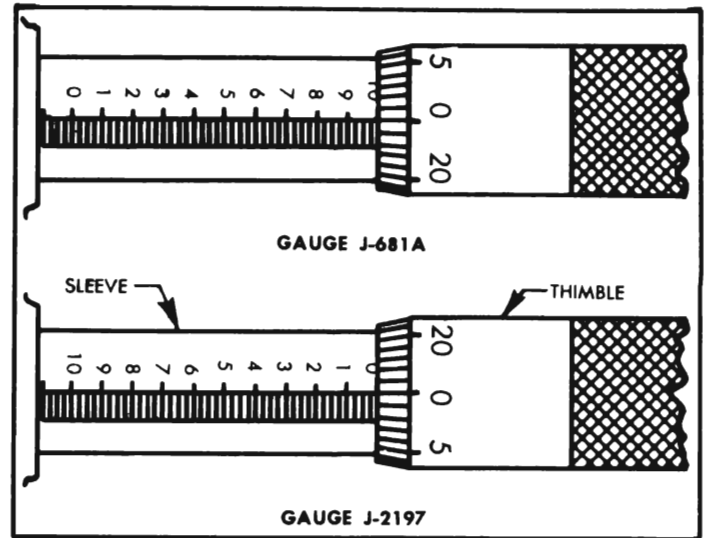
Micrometer Markings on Pinion Setting Gauges J 681-A and J 2197
